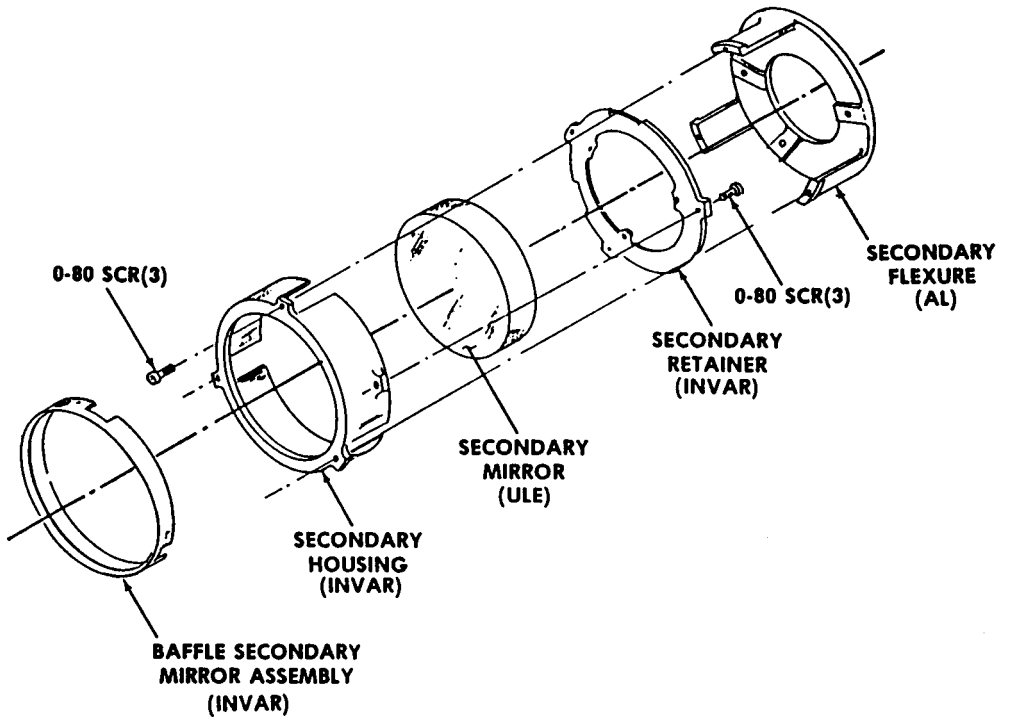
Exploded view of a flexure-mounted telescope secondary mirror intended for a space application. (From Hookman, R. 1989. *Precision Engineering and Optomechanics, SPIE Proc. Vol. 1167*, Vukobratovich, D., ed., p. 368.)
